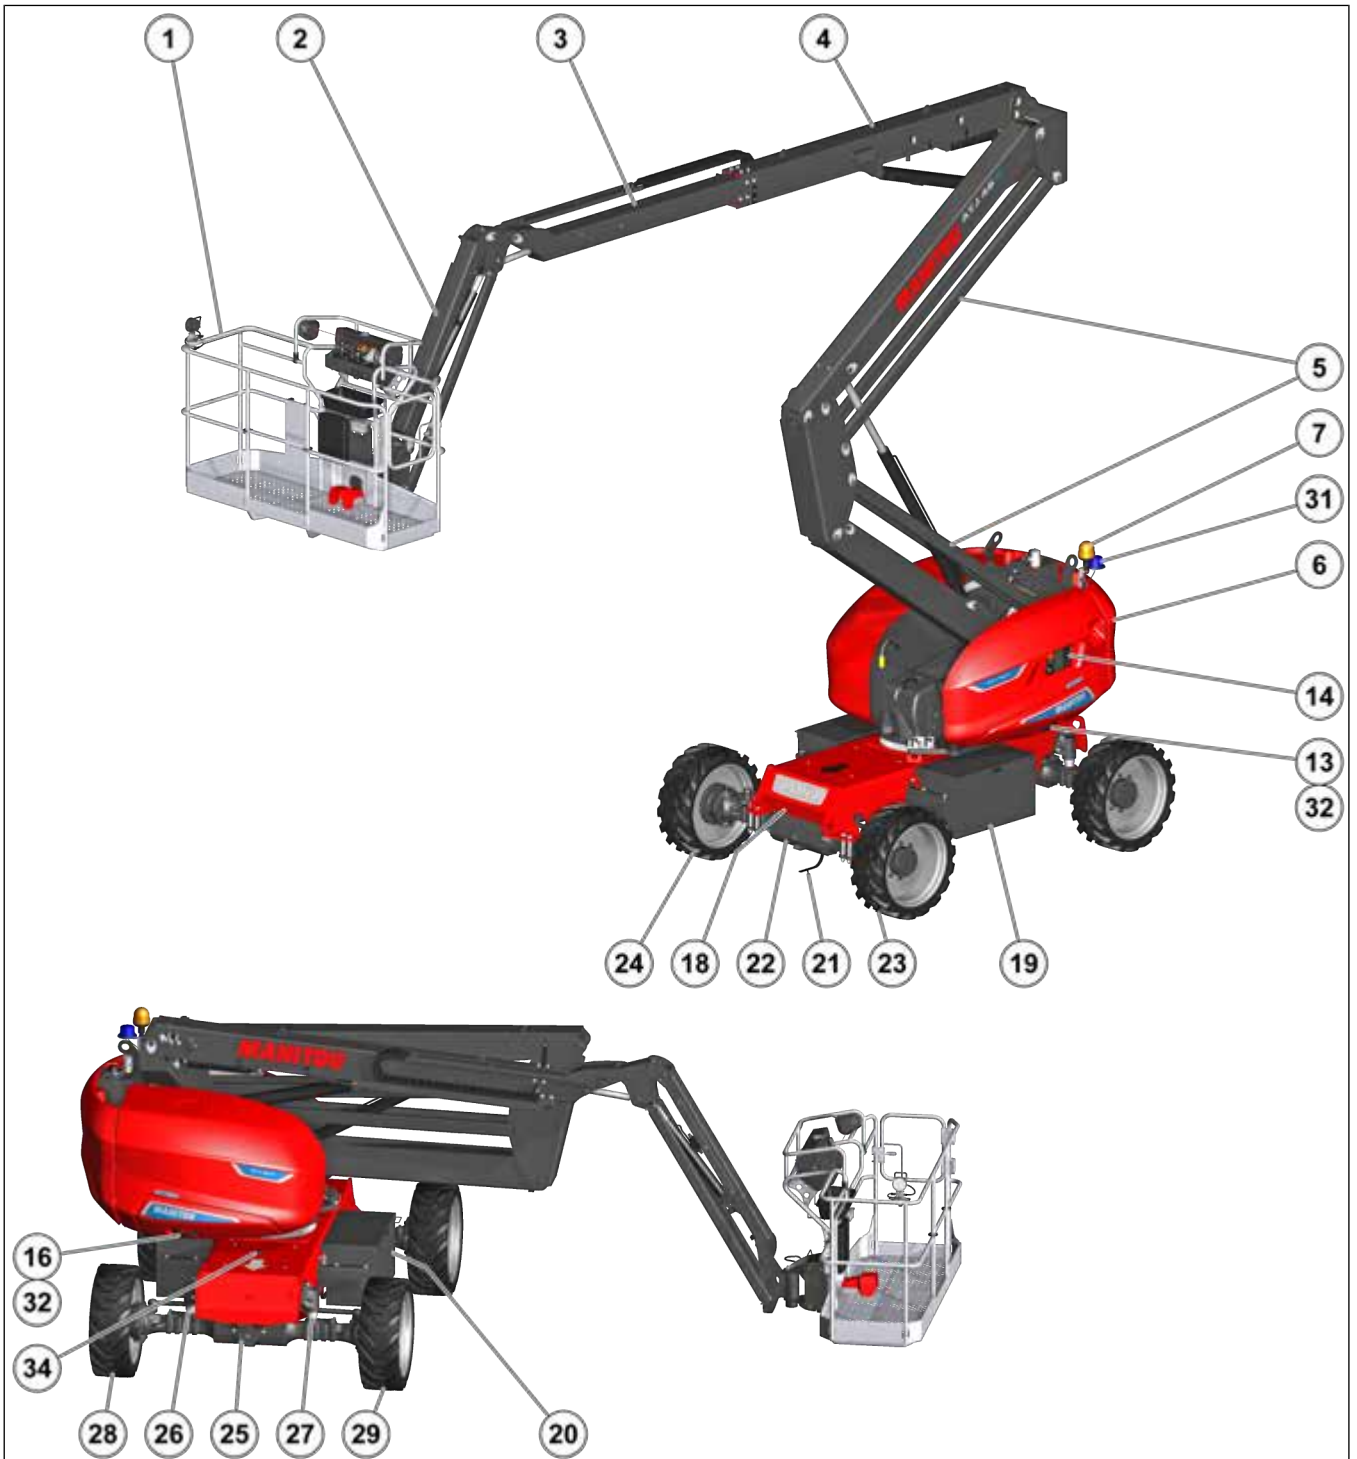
Location of the machine components 1 - ATJ 46 E S1
